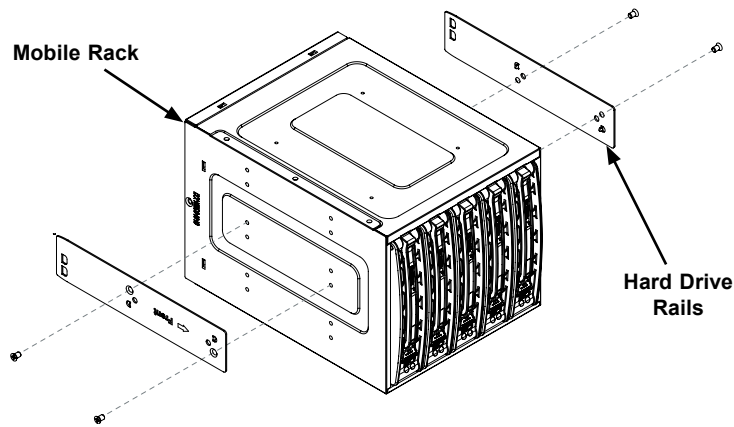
Adding Hard Drive Rails to a Storage Rack
